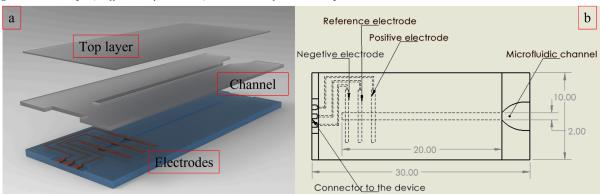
Test Strip. a) different layers and b) dimensions of the test strip.
